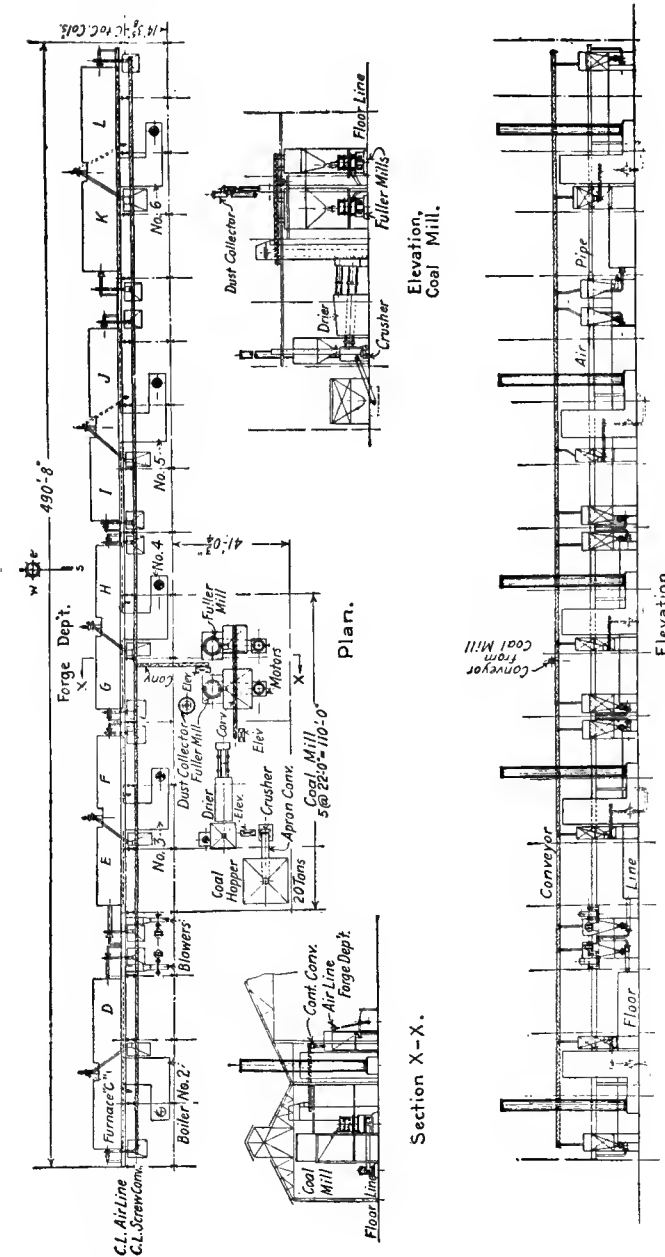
Fuller No. 201, Arrangement of Furnaces.
